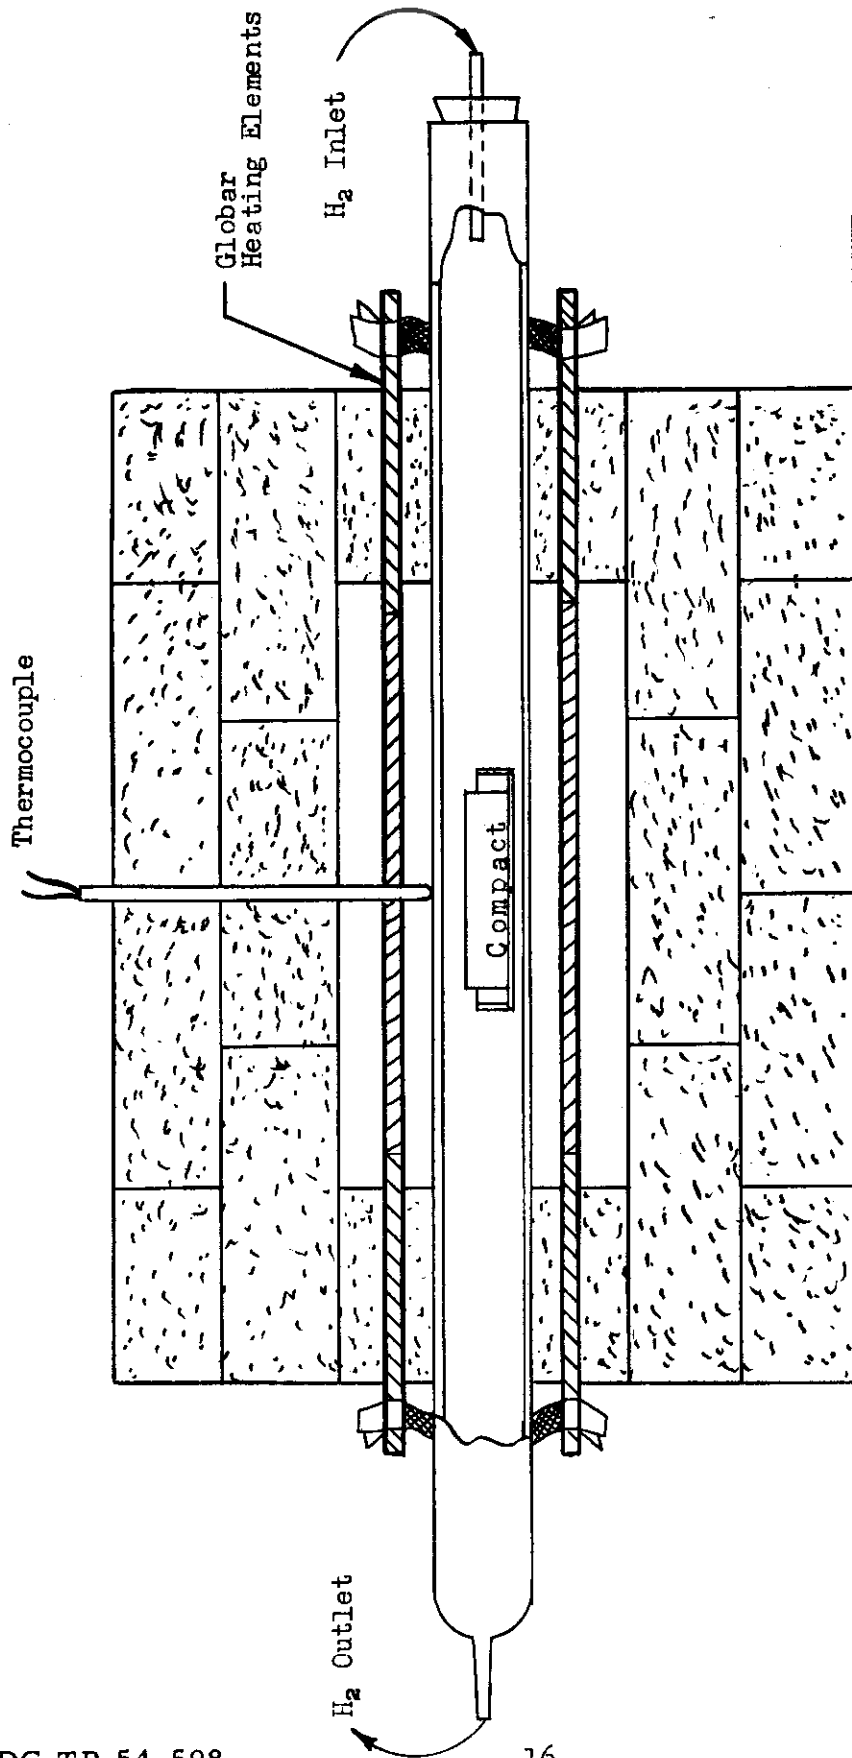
Hydrogen Atmosphere Furnace for Sintering and Infiltrating Wear Test Specimens.
